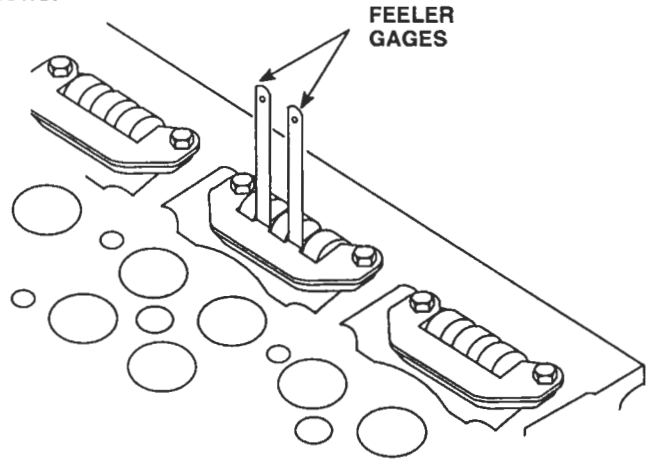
Checking Cam Follower to Guide Clearance and Adjusting Cam Follower Guide
